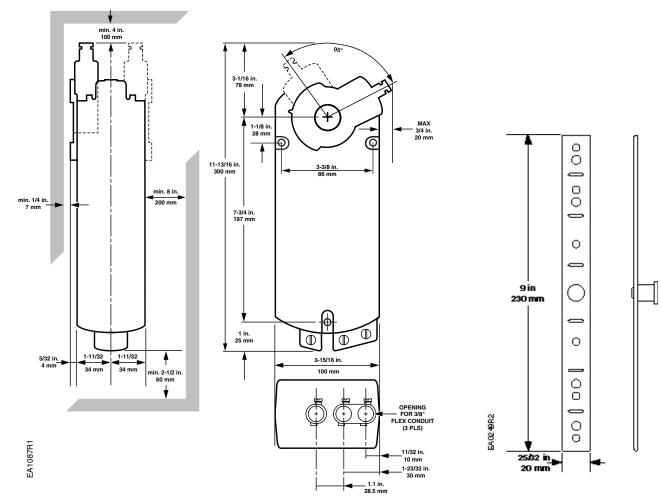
Dimensions of the GCA Actuator and Mounting Bracket in Inches (Millimeters).
